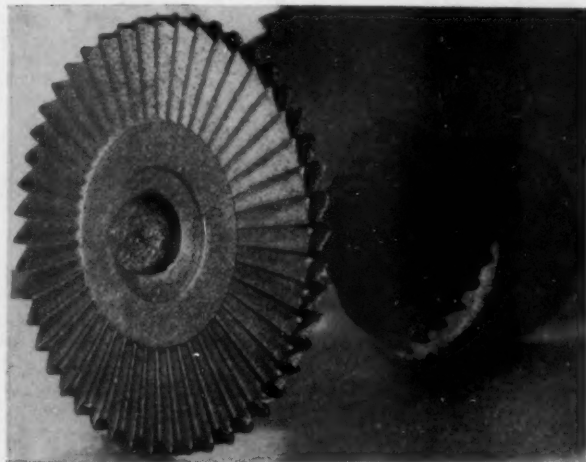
A SIDE MILLING CUTTER CASTING SPUN IN GREEN SAND.
